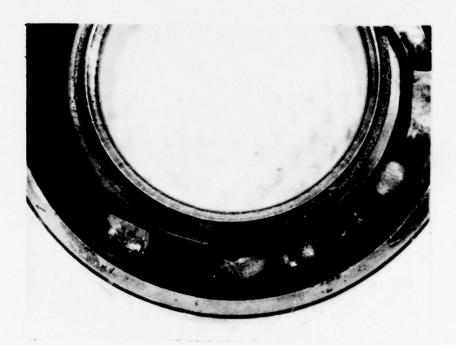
Bearing S/N TRL-15. 2.5x Enlarged View.
